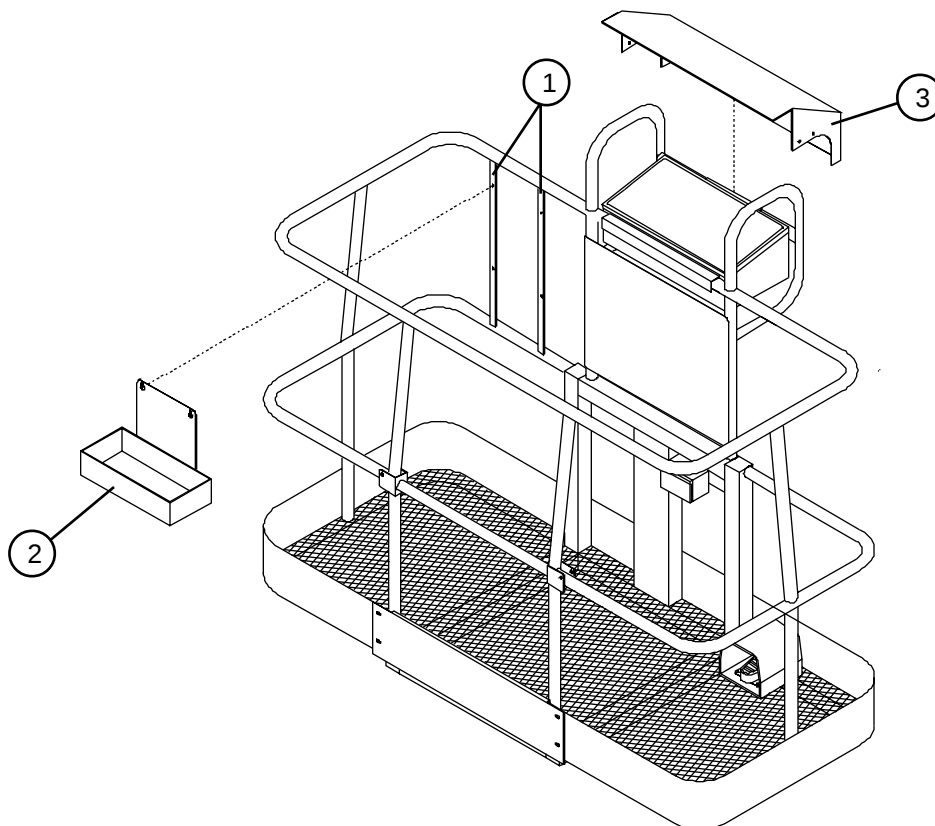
PLATFORM TOOL TRAY/CONTROL COVER OPTION
